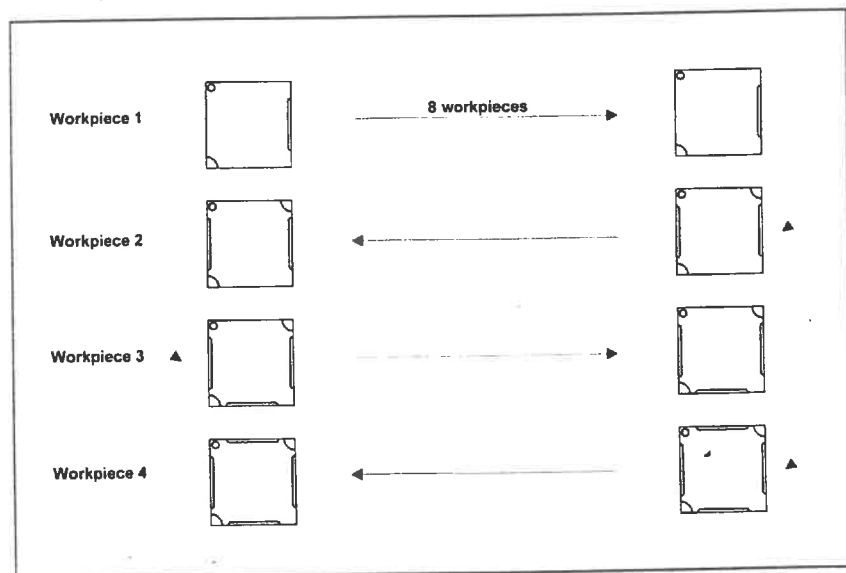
Part program used in the experiment shown in Figure 11. Four pockets and two radii were machined using 4 tools at an infeed of 1 mm.
